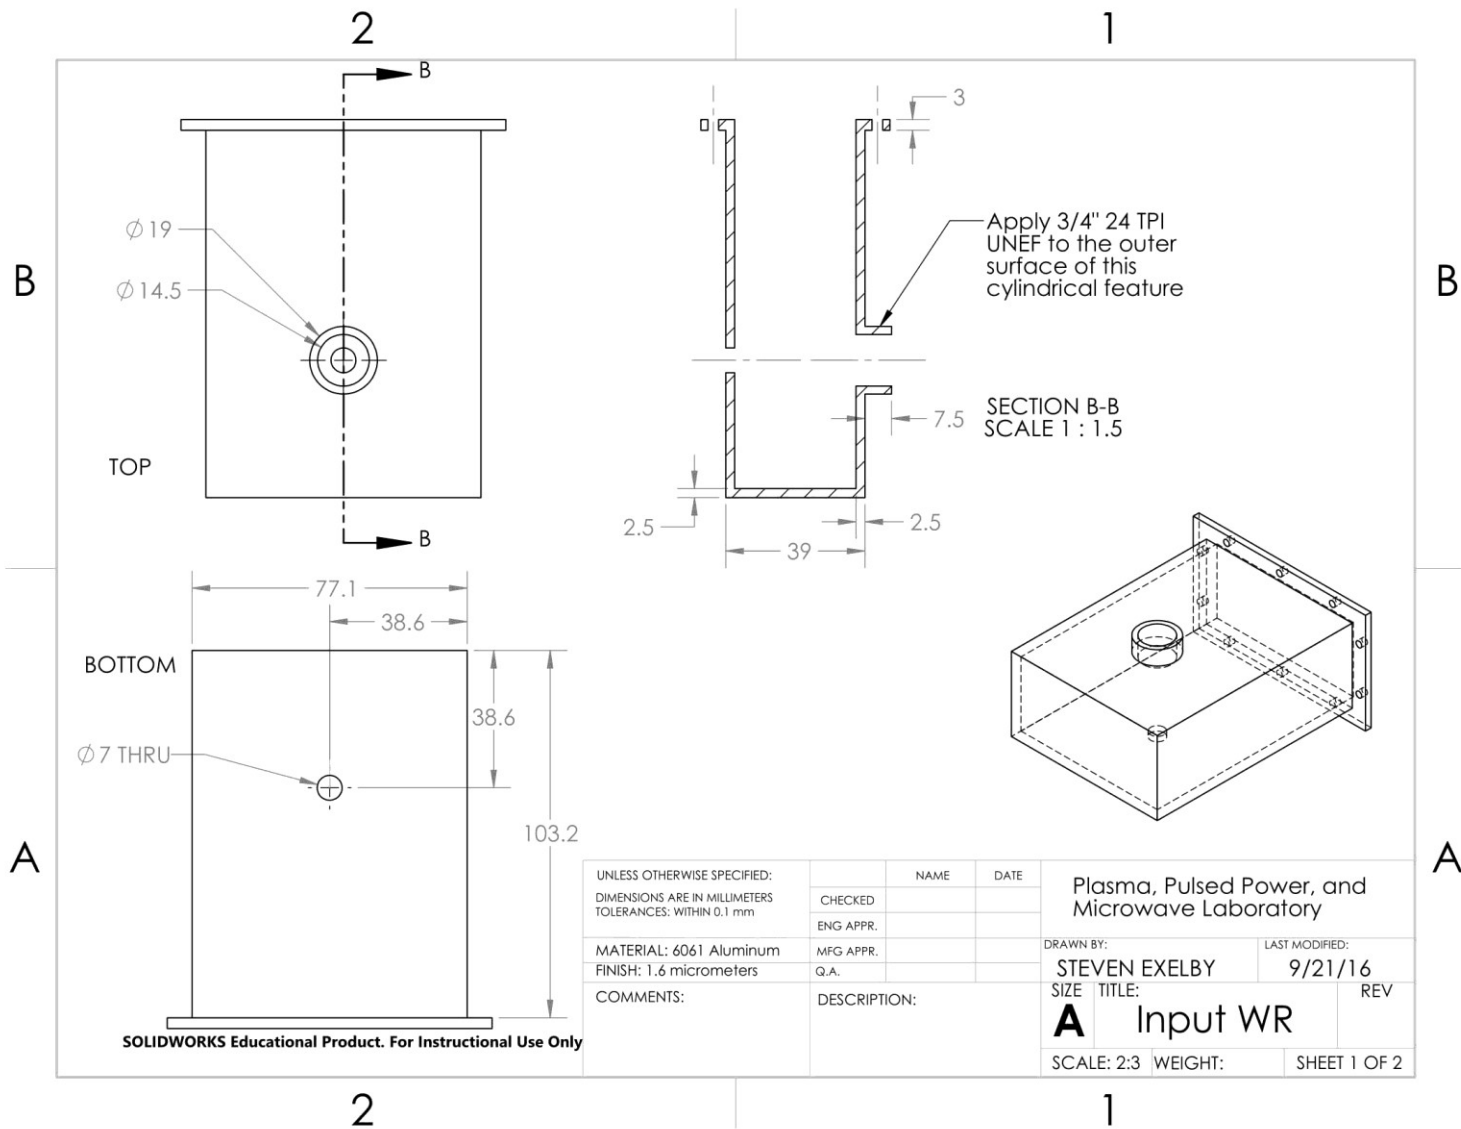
Input side waveguide to RPCFA adaptor. A puck coupler is bolted through the small hole in the bottom, page 1.
